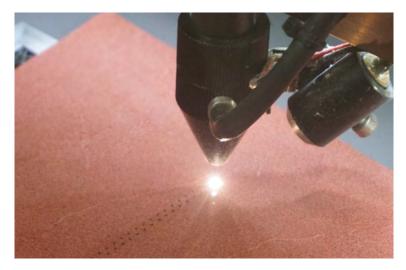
Laser processing by CO2 laser processing machine. The CO2 laser processing is recently spread as the low cost fabrication method.
